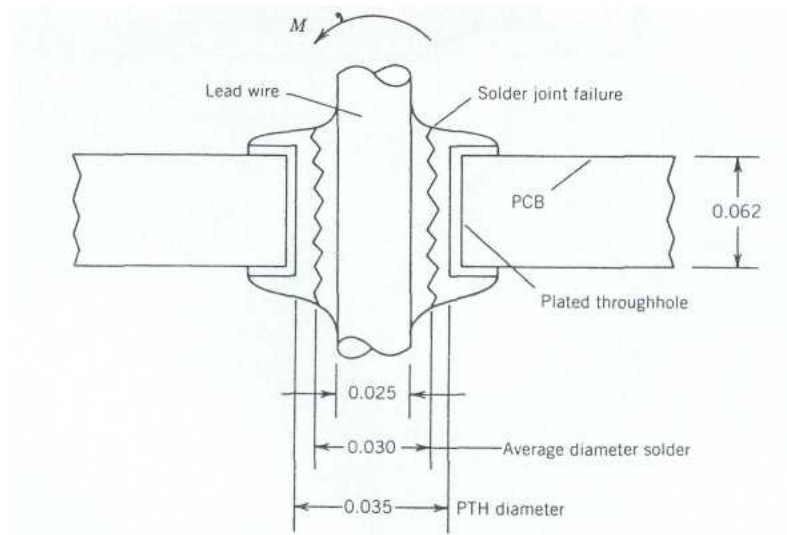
Typical solder joint failure in a throughhole PCB mounting
